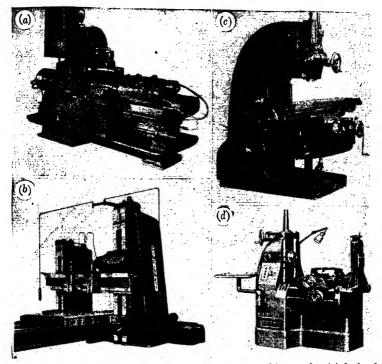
Typical metalworking machines or machine tools: (a) lathe for turning and facing; (b) planer for surfacing and scarfing; (c) milling machine for cutting and shaping; (d) autometric precision boring machine for drilling, reaming, and threading.
